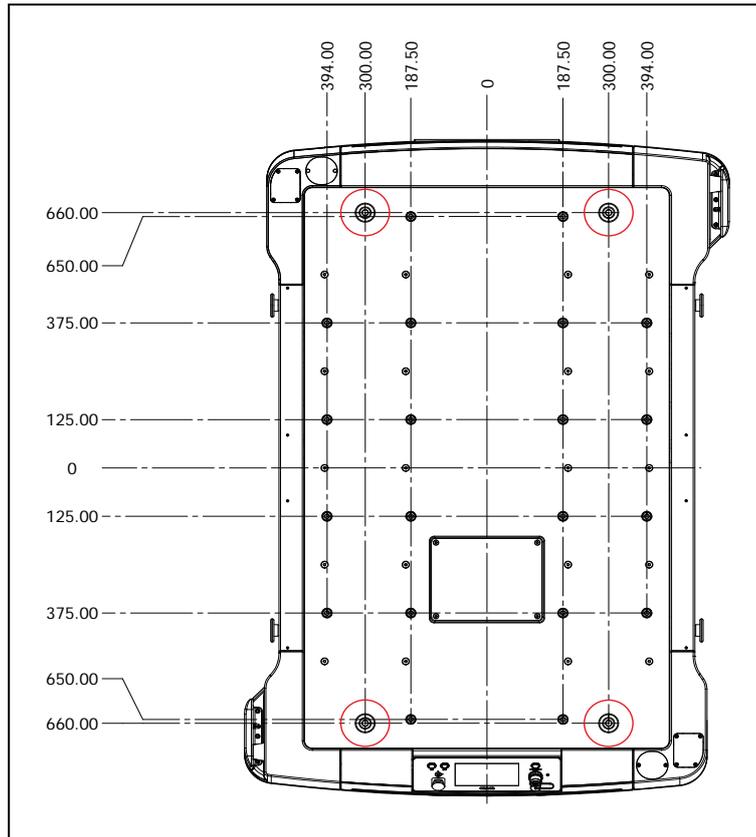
Lifting Mount Locations - (4) M16 X 2 Threaded Holes
